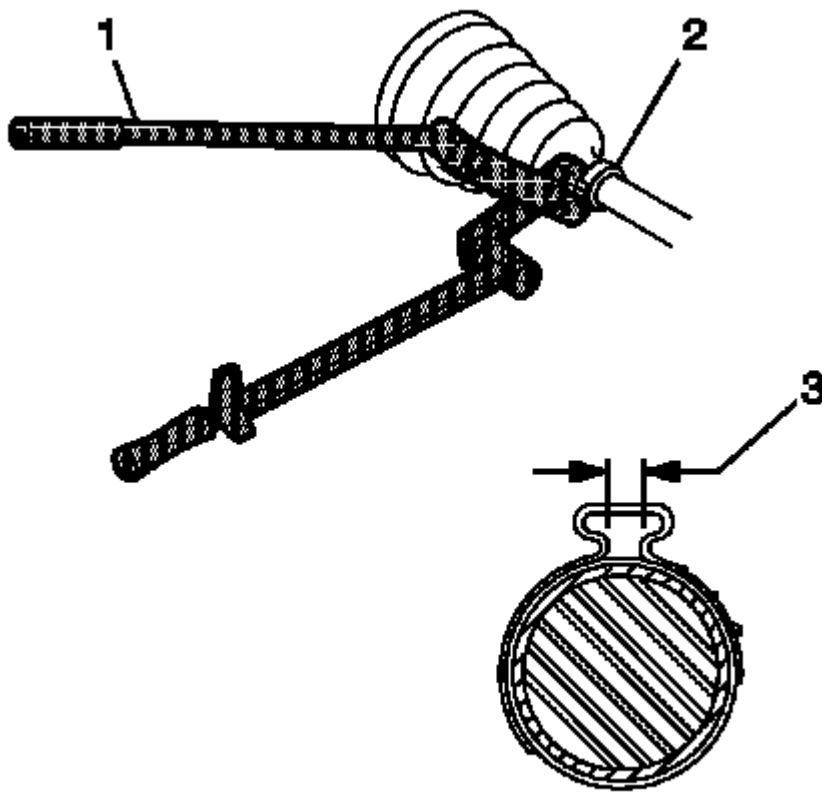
Identifying Pliers Breaker Bar, Torque Wrench, Ratchet & Gap Measurement
